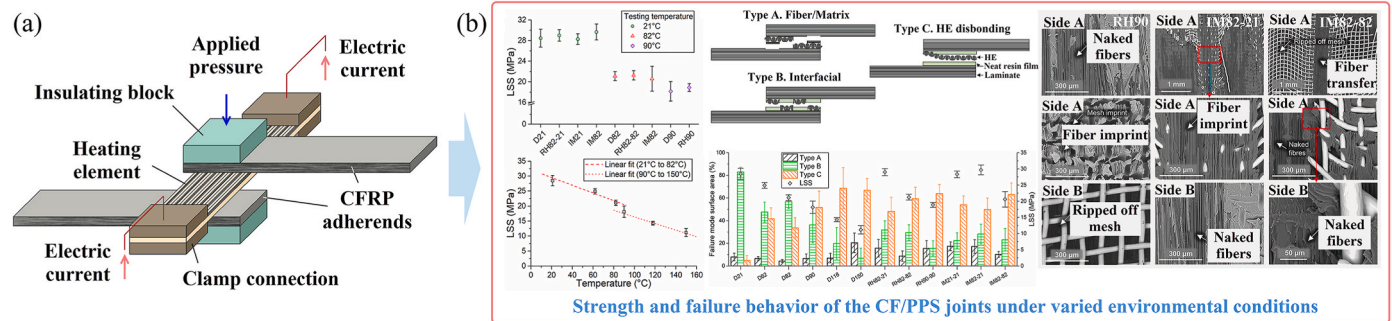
Schematic of (a) the resistance welding and strength and (b) corresponding failure behavior of the CF/PPS welded joints [128].
